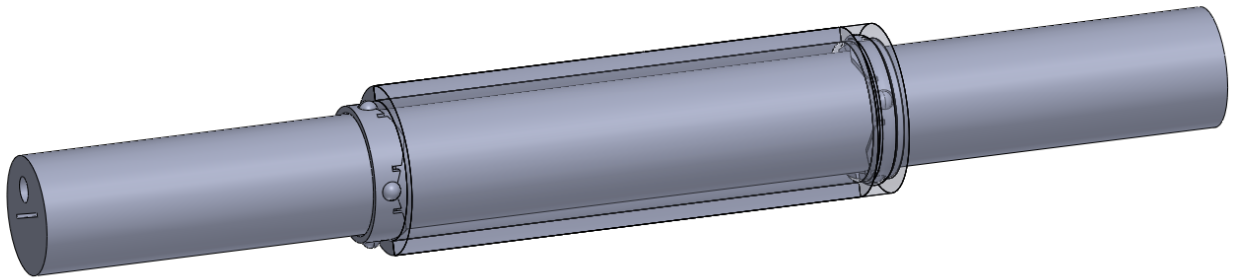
CAD model of the structural link integrated with the bearing. The left bearing housing is hidden and surrounding components are rendered transparent to reveal the internal assembly.
